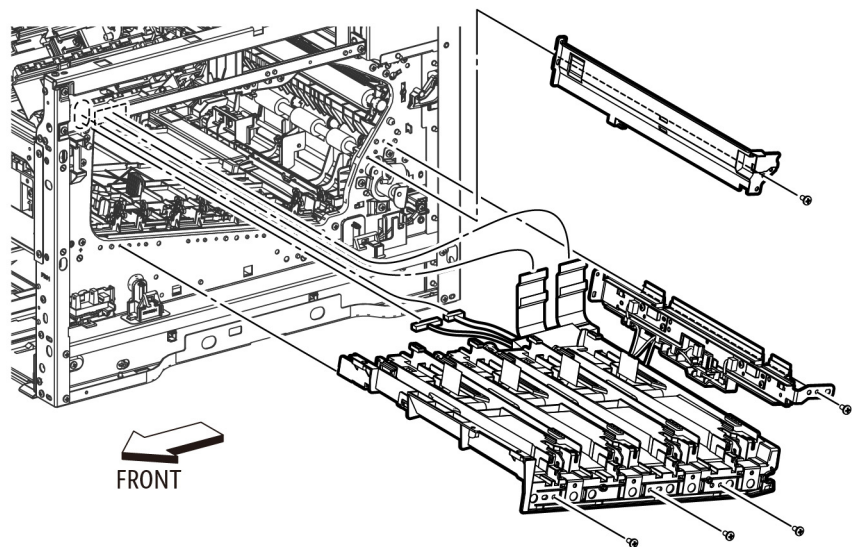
Remove the CTD Sensor Cover, Sensor, and LPH FFC Xerographic CRUM
